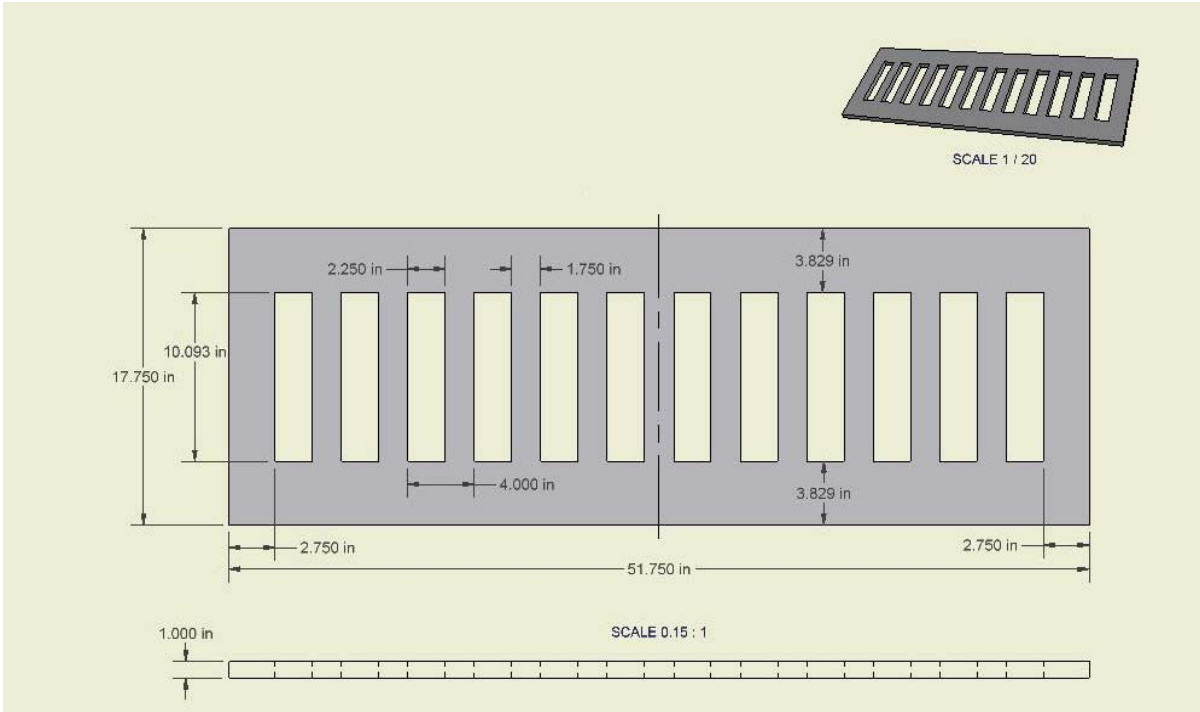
RCCS Tube Bottom Alignment Plate.
